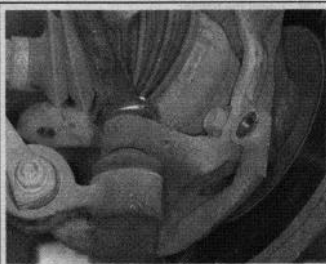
Remove the cotter pin from the axle shaft . . .
